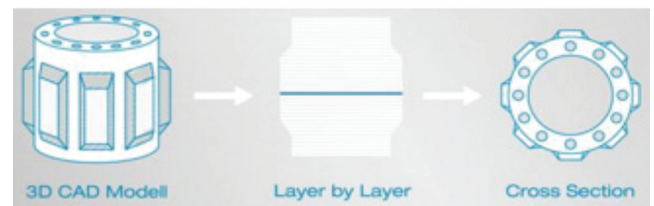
Illustrative AM conversion of CAD model to cross-sectional layer
